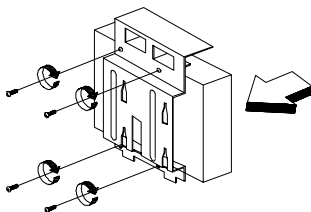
Attaching a Hard Disk Drive to the Bracket
